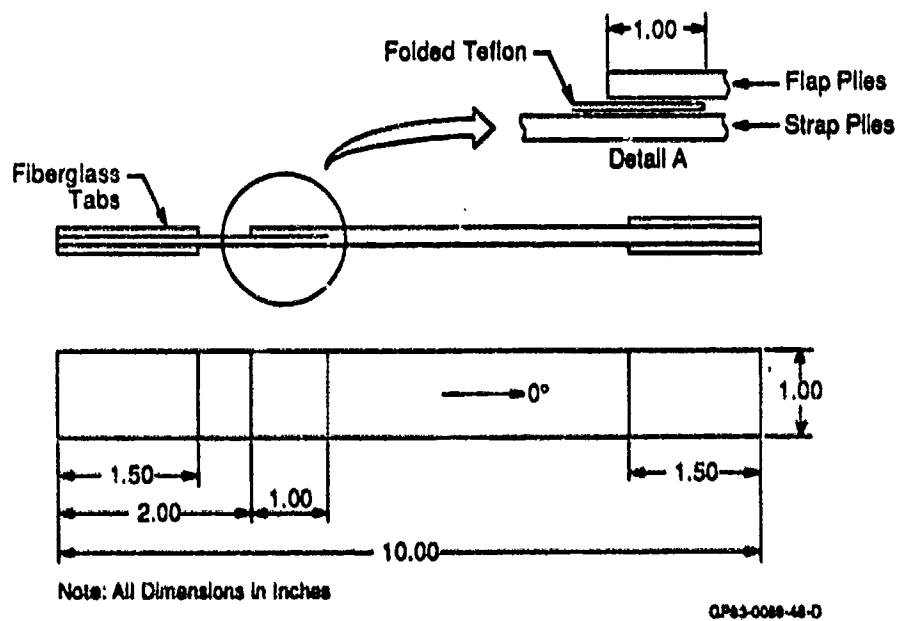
Cracked Lap Shear (Mixed Mode) Fracture Toughness Specimen
